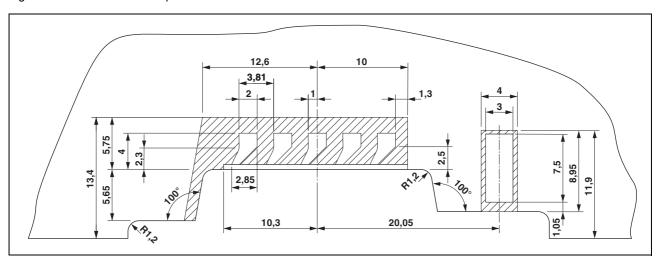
Detailed dimensional drawing of the contact pads of the 5-pos. DIN rail connector for the 9U housing with FE contact
